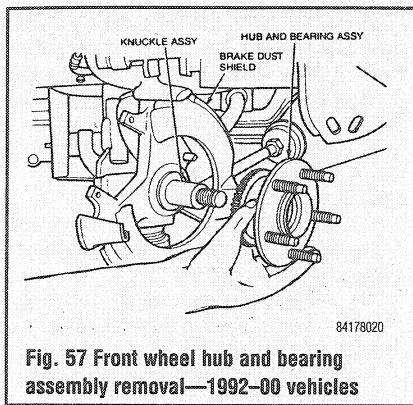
Front wheel hub and bearing assembly removal—1992-00 vehicles
